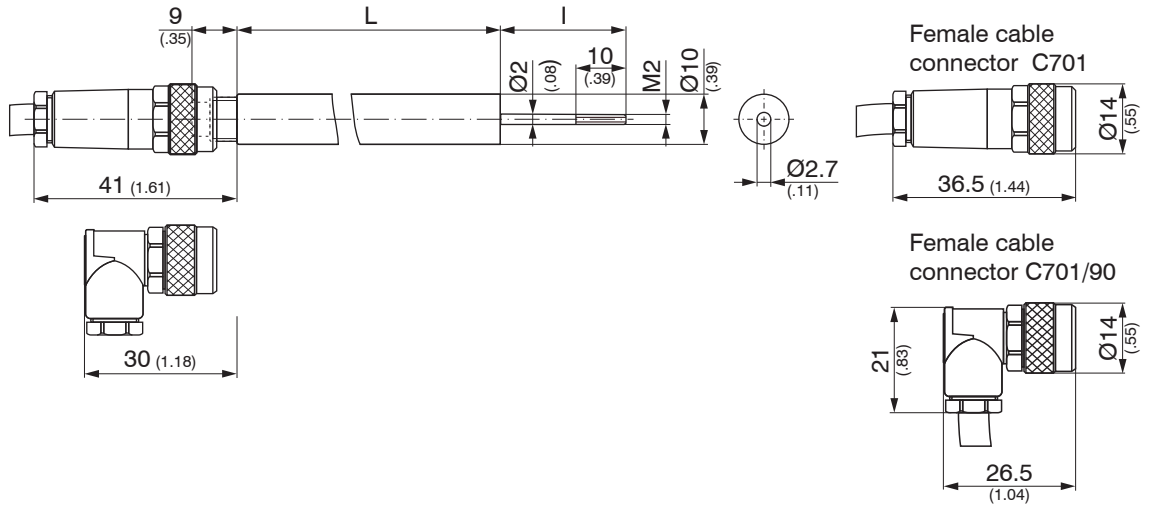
Displacement sensor type - SA with axial plug connection, dimensions in mm (inches), not to scale
